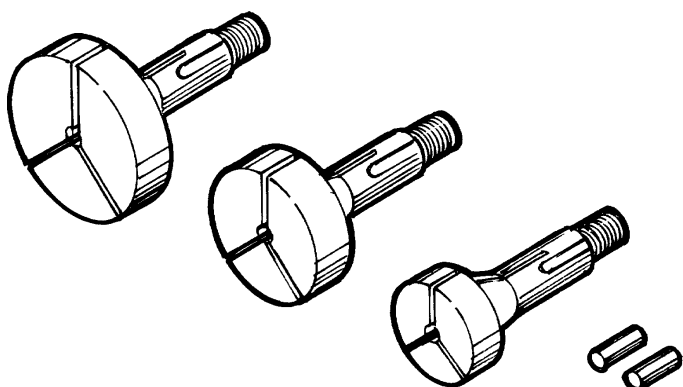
"Pot" or "step" collets and dowel pins, 1-1/4" (P/N 2102), 1" (P/N 2101) and 3/4" (P/N 2100).
